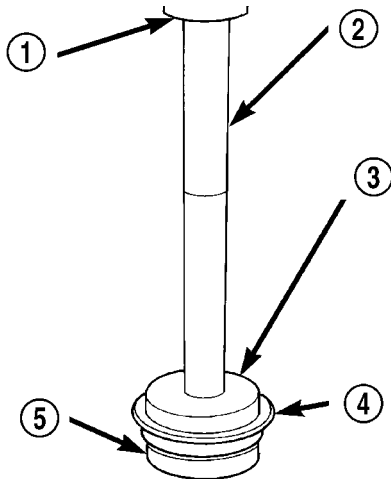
Install Transfer Shaft Bearing Cup Into Retainer
